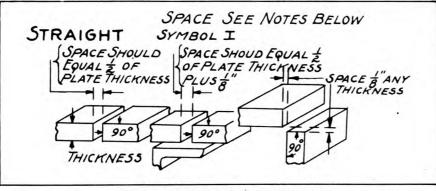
STRAIGHT DESIGN OF ELECTRIC WELD
